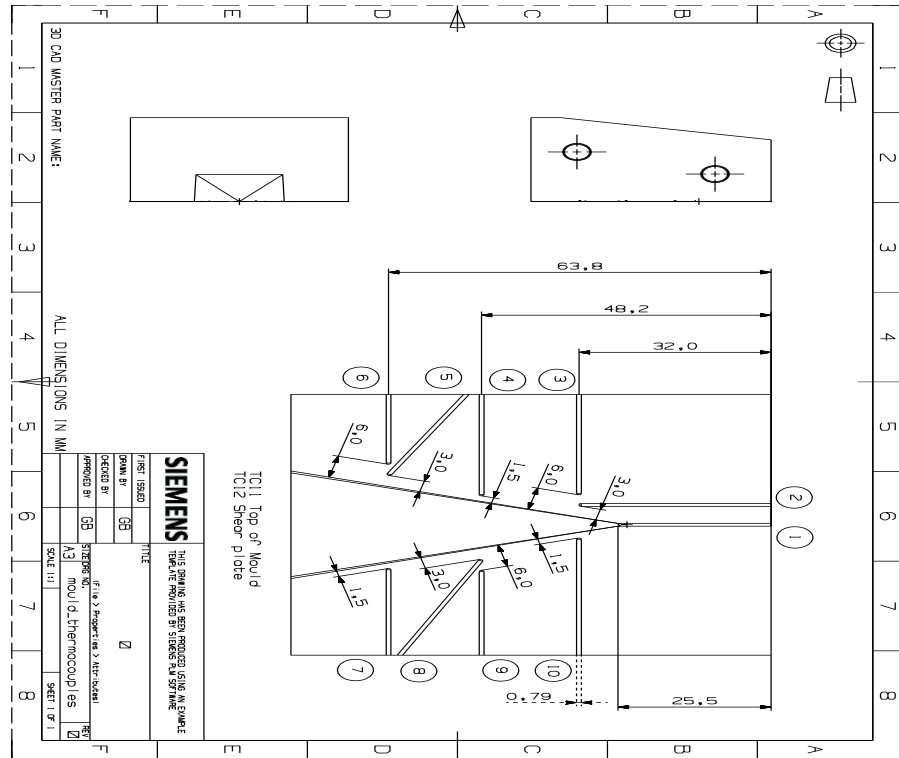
Dimensioned drawing of the steel pyramidal mold
